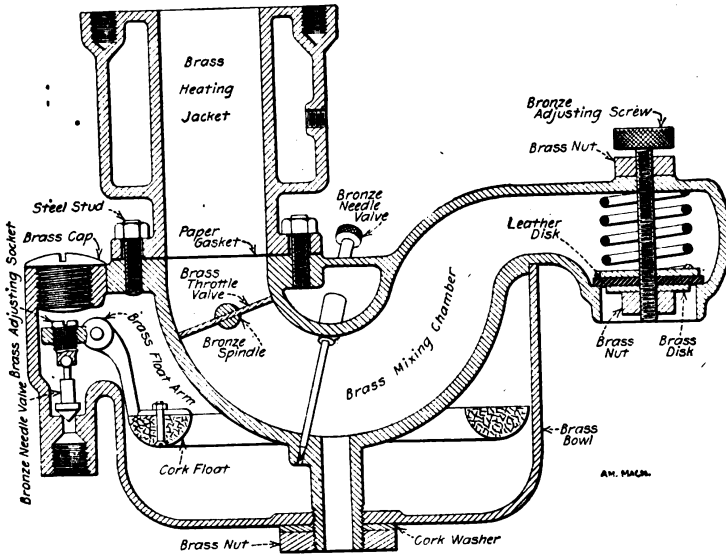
THE PRINCIPAL PARTS AND MATERIALS OF A CARBURETOR
